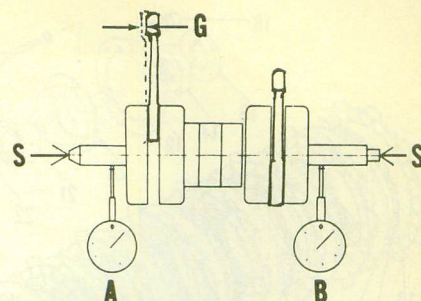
Refer to text for checking crankshaft for correct assembly or wear.
